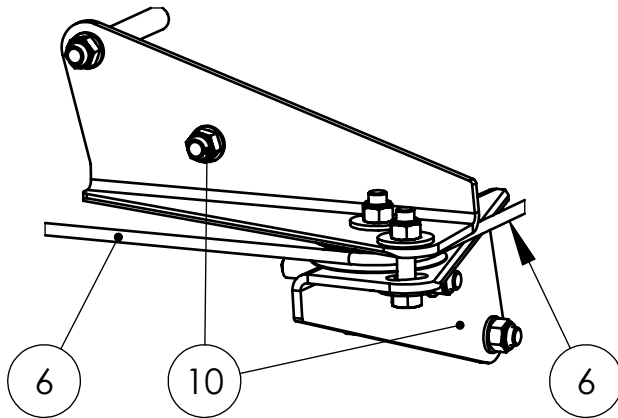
Method of system cable drawing through the HL202 intermediate rope holder .
